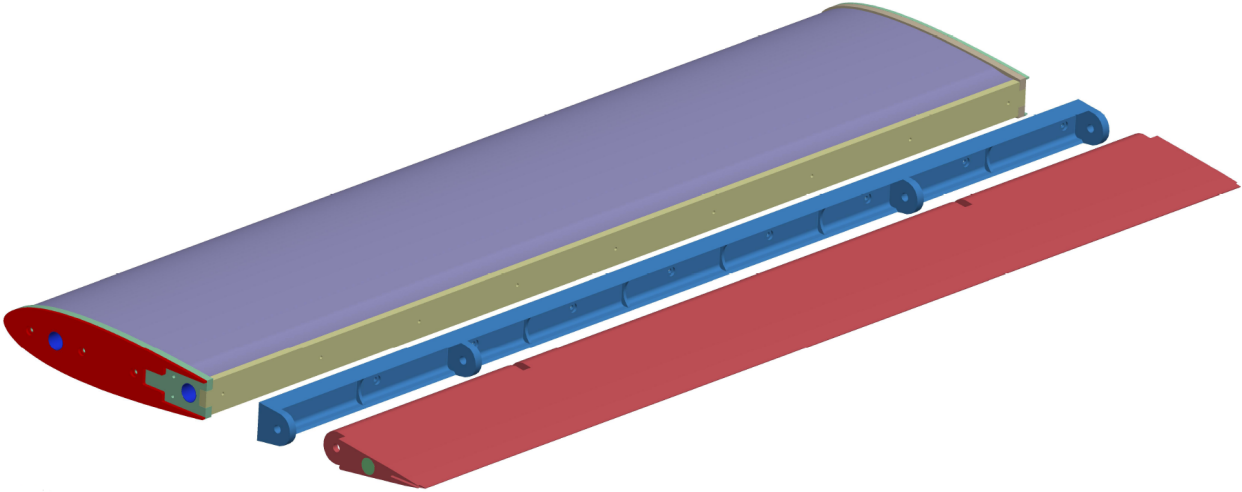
Exploded isometric view of the CAD model for the 30% of chord flapped W1015 airfoil.
